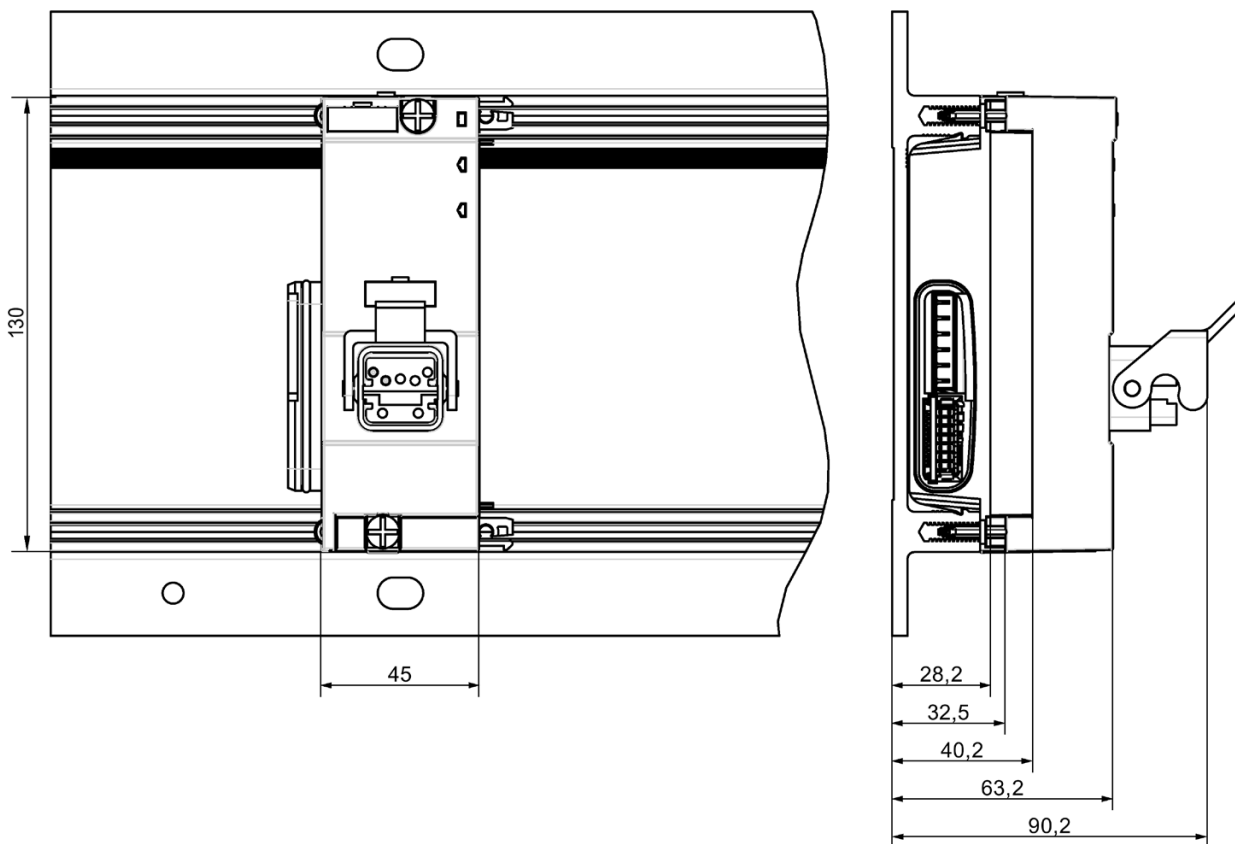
Dimensional drawing of the power module with CM PM Direct connection module
